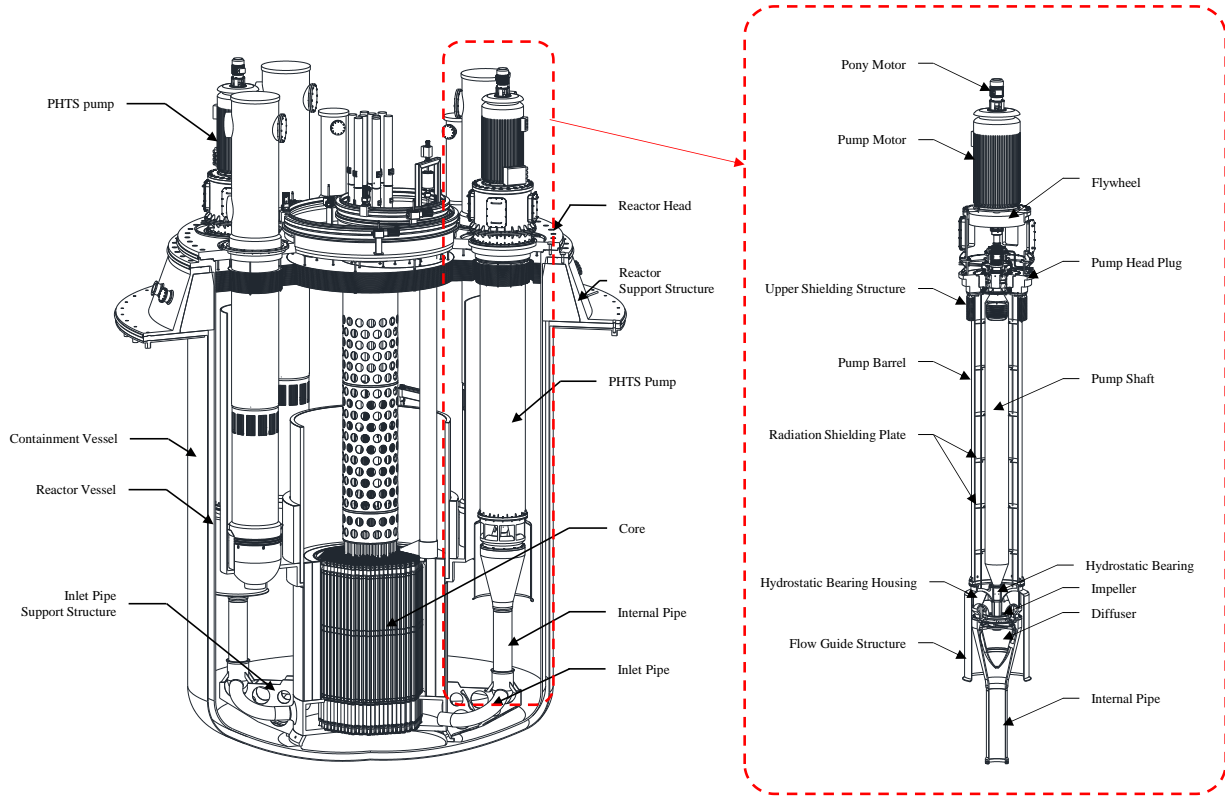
Overall shape and arrangement of the PGSFR reactor assembly and the PHTS pump
